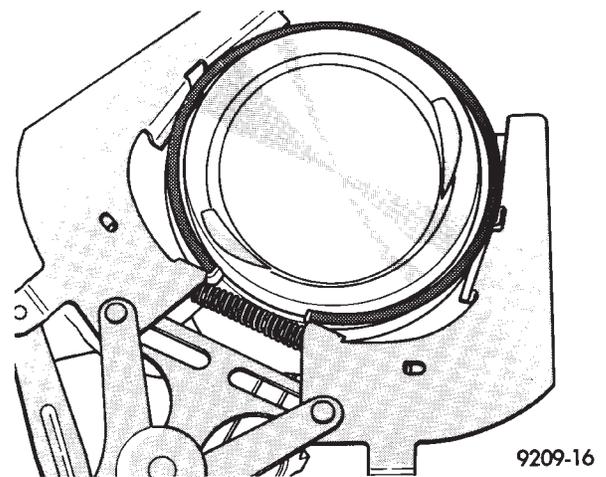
Piston Rings—Removing and Installing PISTON RING—REMOVAL
